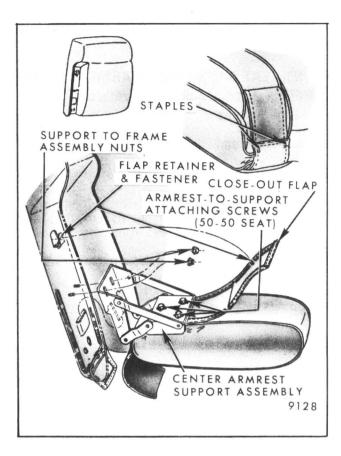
Front Seat Back Center Armrest - Cadillac 50-50 Driver's and Passenger's Seat
